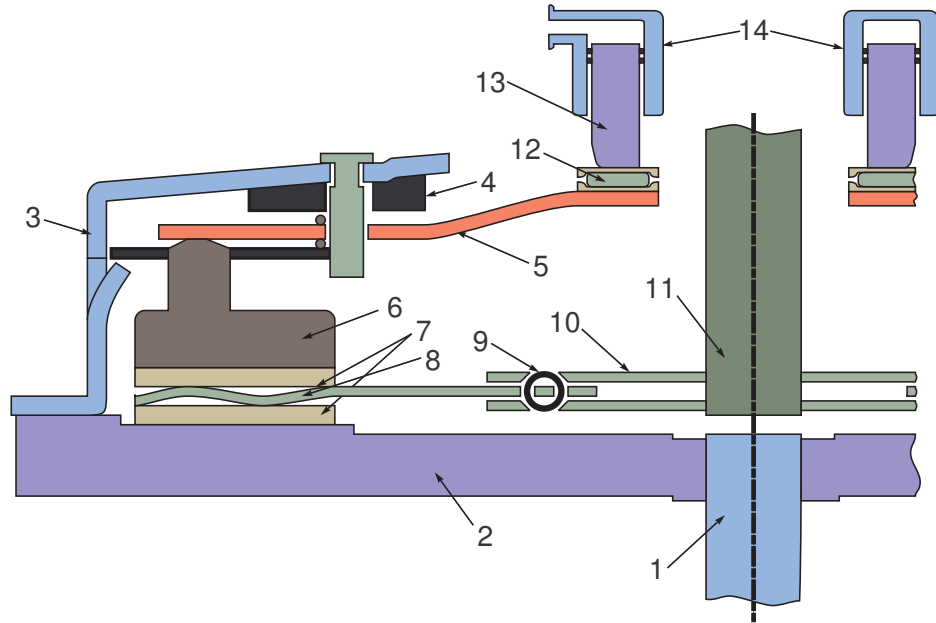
Clutch structure, axial cut. 1 crankshaft - 2 flywheel - 3 clutch external structure - 4 wear compensation system - 5 washer spring - 6 pressure plate - 7 friction pads - 8 flat spring - 9 spring damper - 10 clutch disk - 11 gearbox primary shaft - 12 needle roller bearing - 13 Concentric Slave Cylinder (CSC) piston - 14 Concentric Slave Cylinder (CSC).
